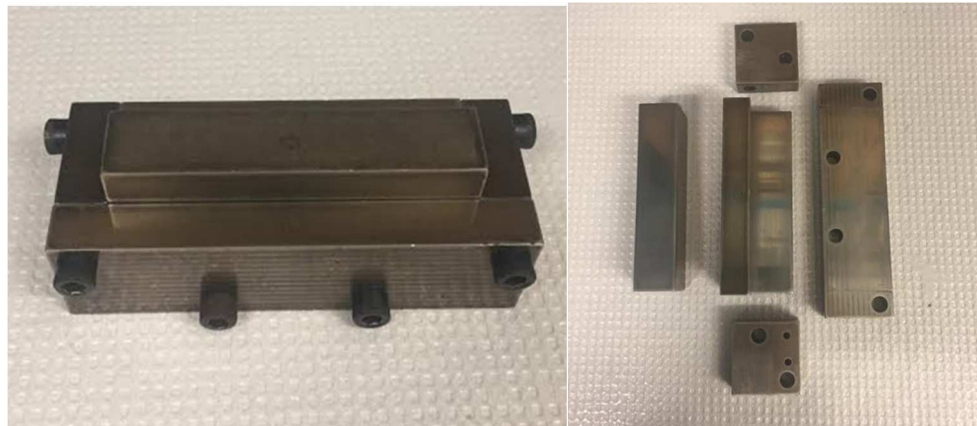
Steel mold used for the bricks created in the vacuum oven and heated press (fully assembled, left; not assembled, right).
